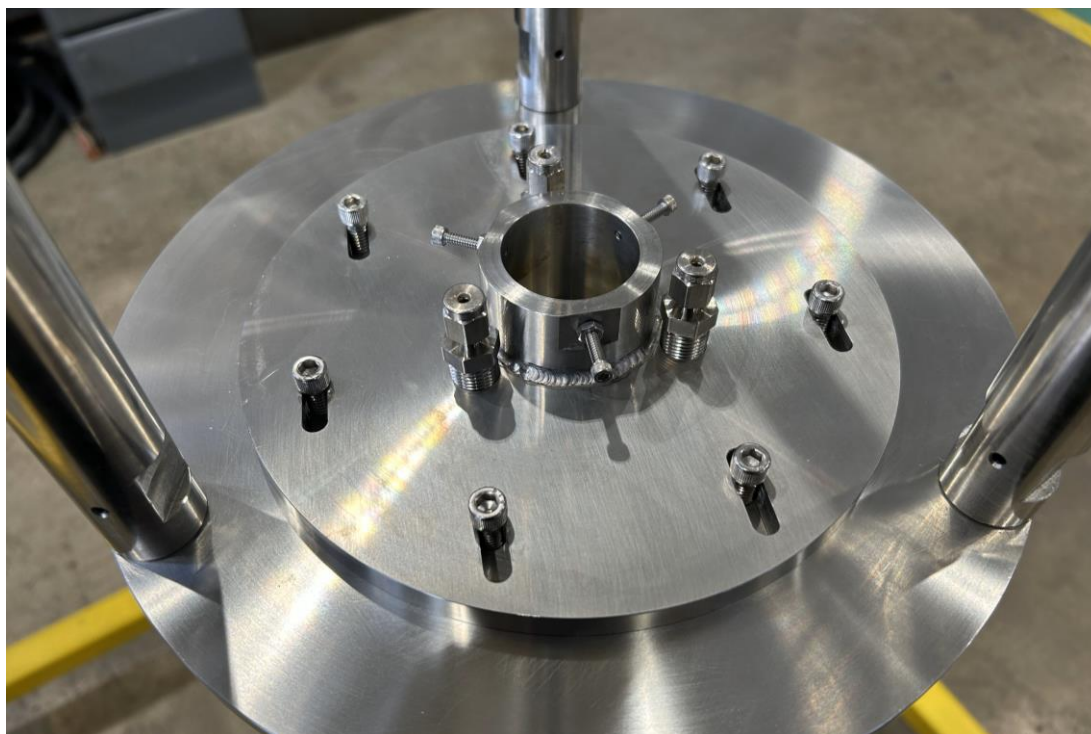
Close-up view of test section baffle plate. This piece also doubles as a piece used to position the rabbit tube relative to the test section.
